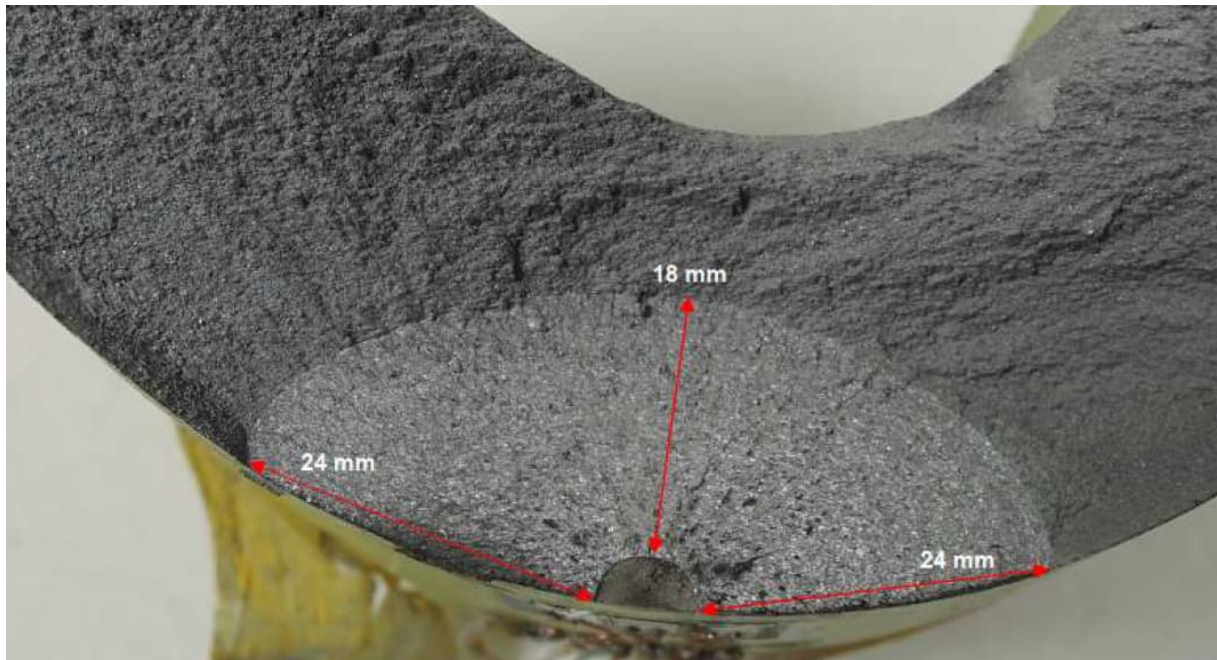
The fatigue crack surface in position 2.3.1c. Red arrows indicate the fatigue crack.
